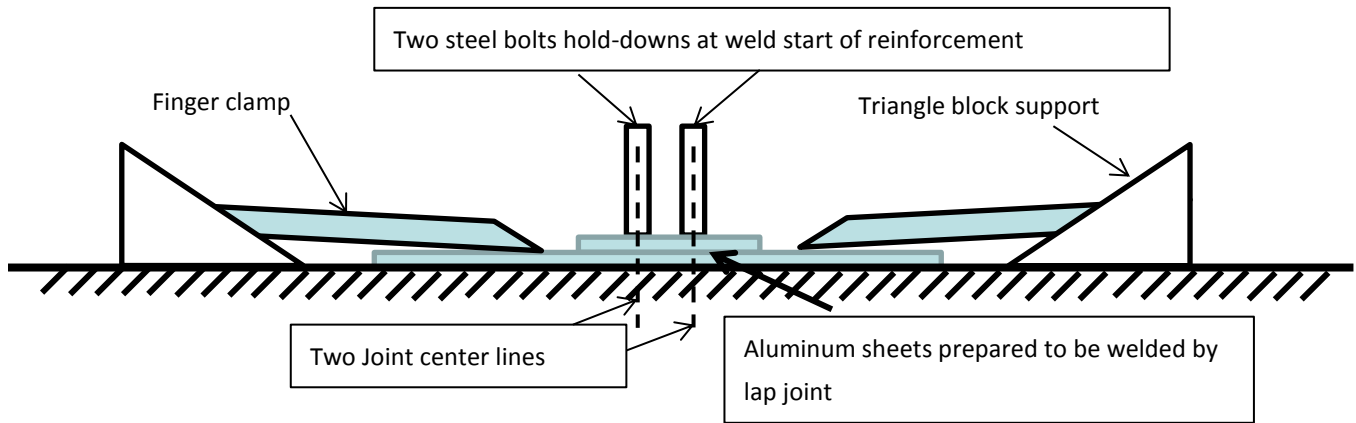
Schematic picture of weld-start-only-clamping method
